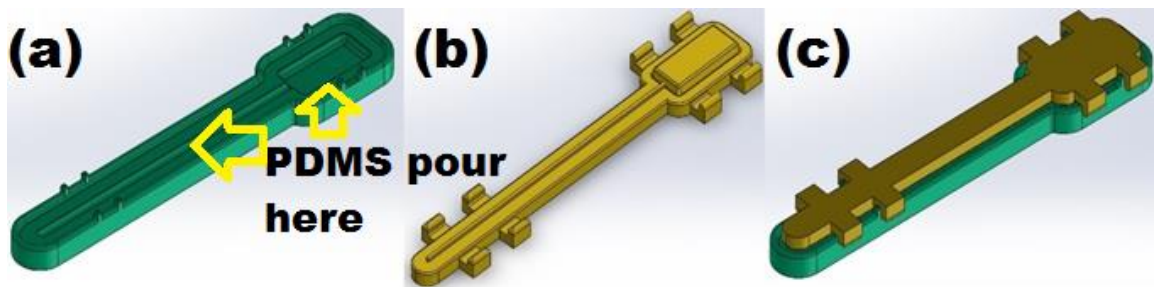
Bottom (a) and top (b) half of the new mold, and mold assembly (c).
